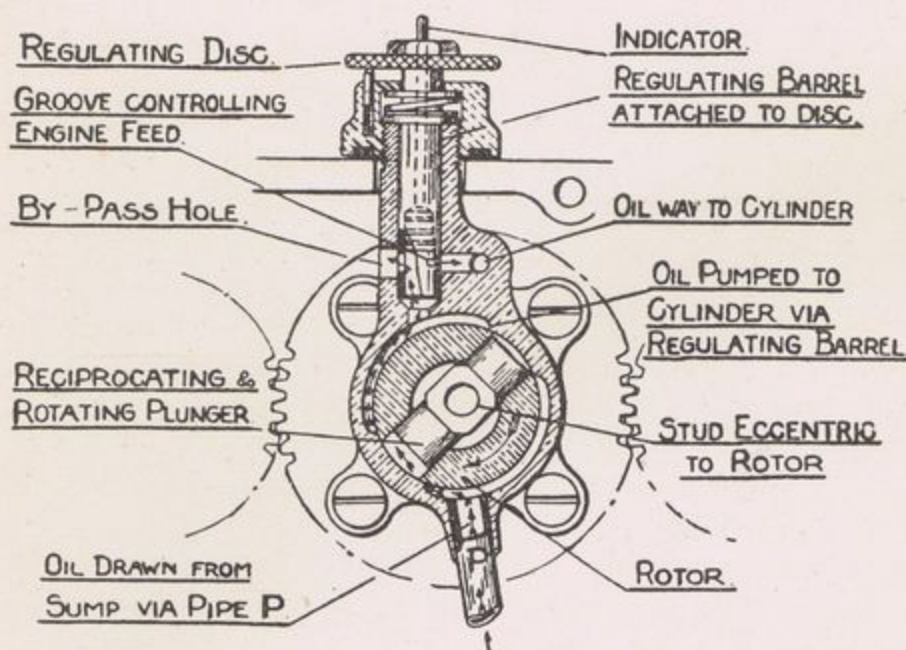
SECTIONAL VIEW OF ROTARY OIL PUMP
